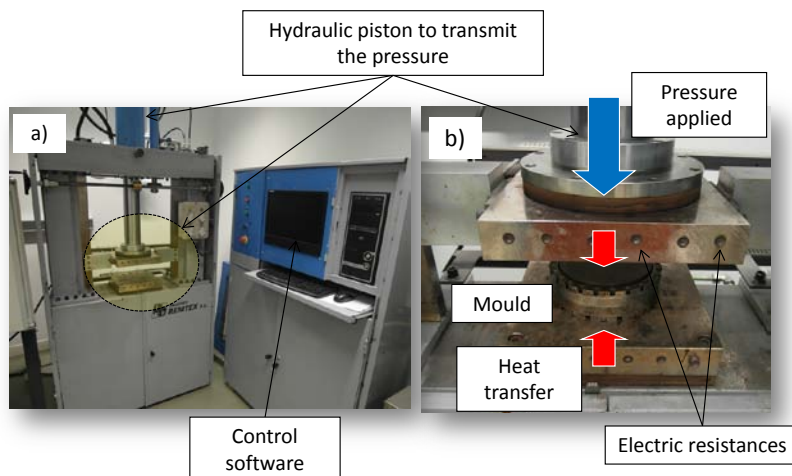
a) Automatic hydraulic press. b) Cylindrical mould between the hot-plates press.
